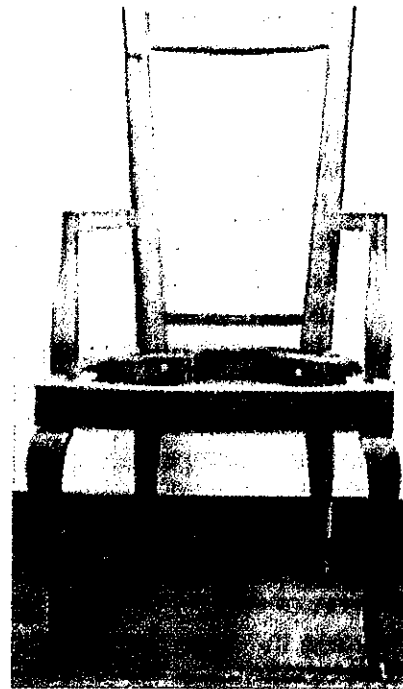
Modified corner blocks bolted on the rail and back legs of prototype chair
